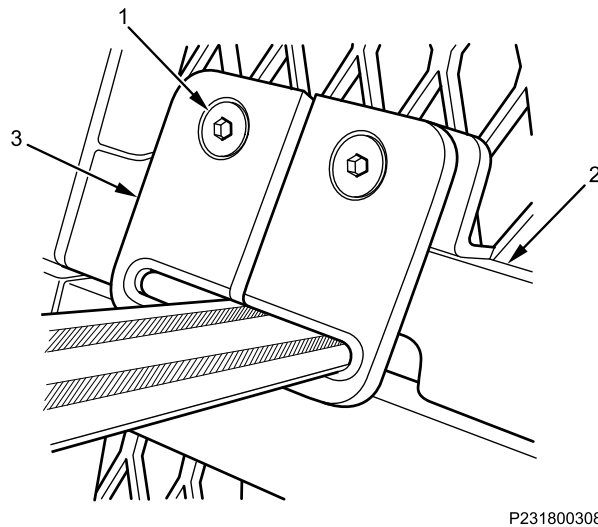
Gunner Platform Stand Floor Mounting Bolts.
